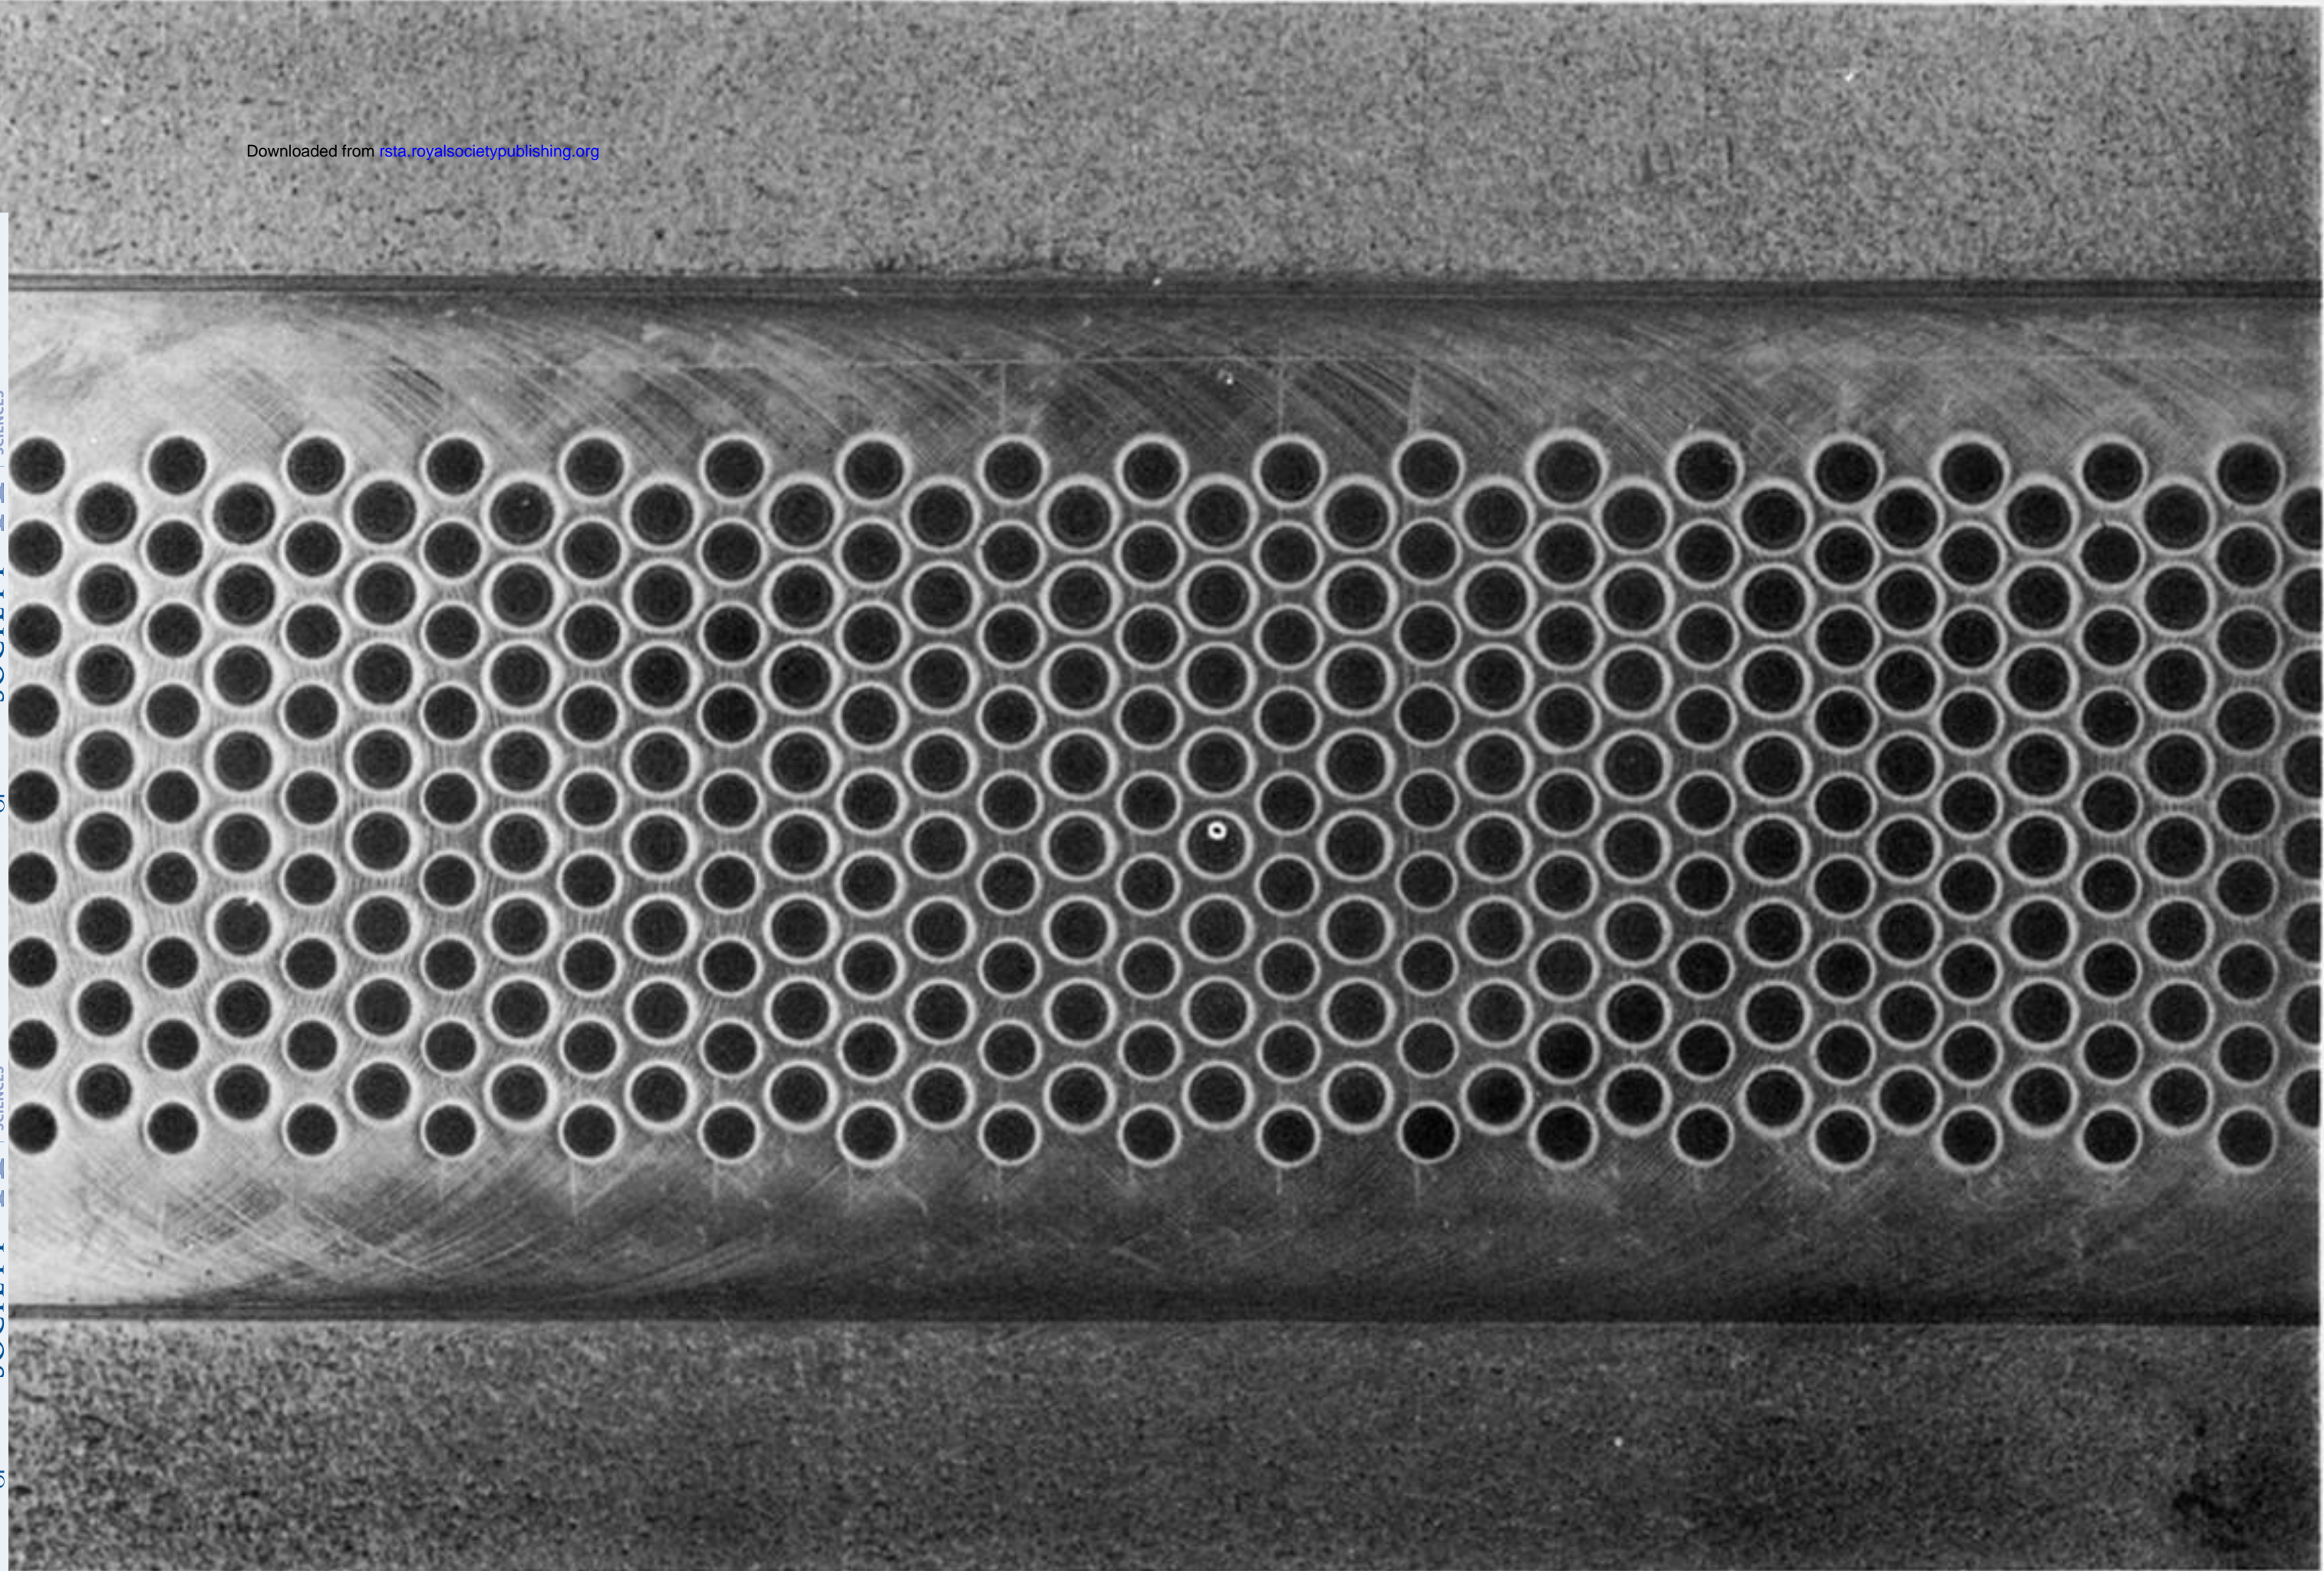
Density of holes possible with electrojet machining. (Magn.  $\times 6$ .) (Courtesy Rolls-Royce Ltd.)
